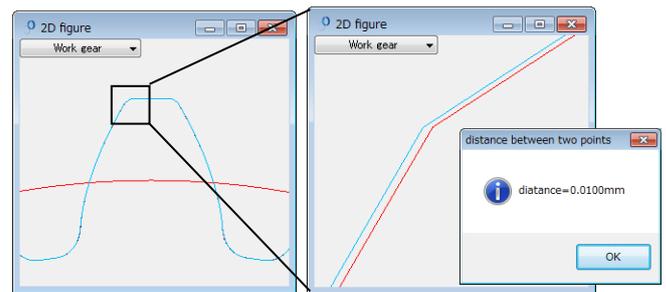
Measurement of theoretical tooth profile and grinding tooth profile
